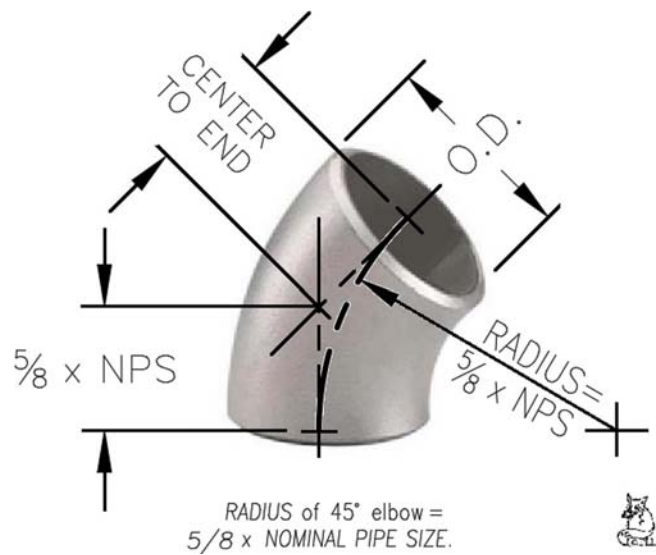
Center-to-end dimension of a 45° elbow.
